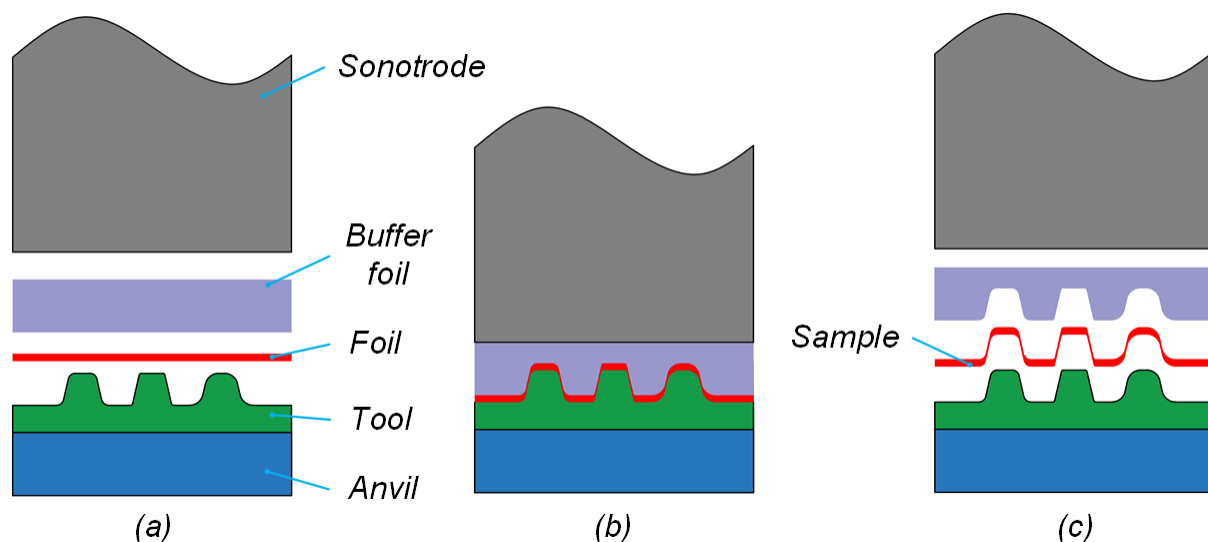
Ultrasonic thermoforming by using a buffer foil as a mold.
